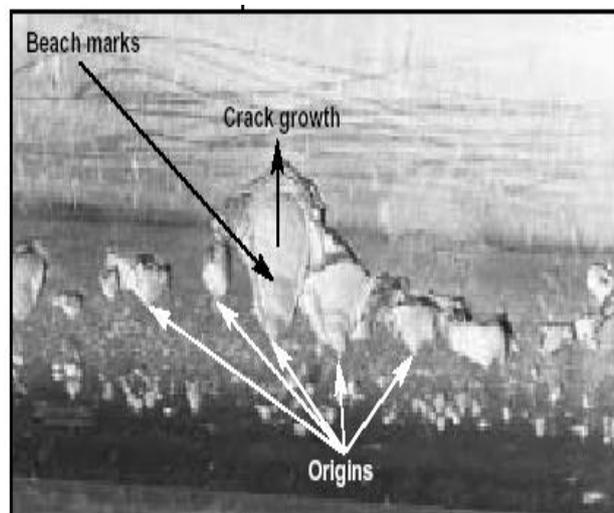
Bending fatigue fracture of gear teeth Figure.3.2: Surface fatigue fracture of gear teeth
